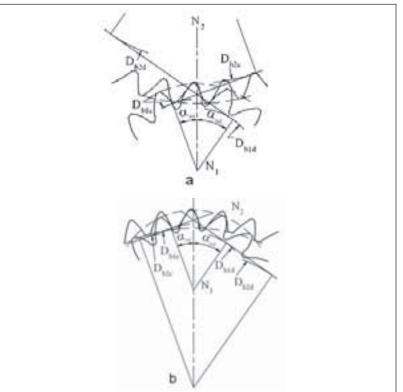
Asymmetric gear mesh; a-external gearing; b-internal gearing;  $\alpha_w$ -operating pressure angle;  $D_{_{b1,2}}$ -operating pitch circle diameters; subscripts "1" and "2" are for the mating pinion and the gear.
